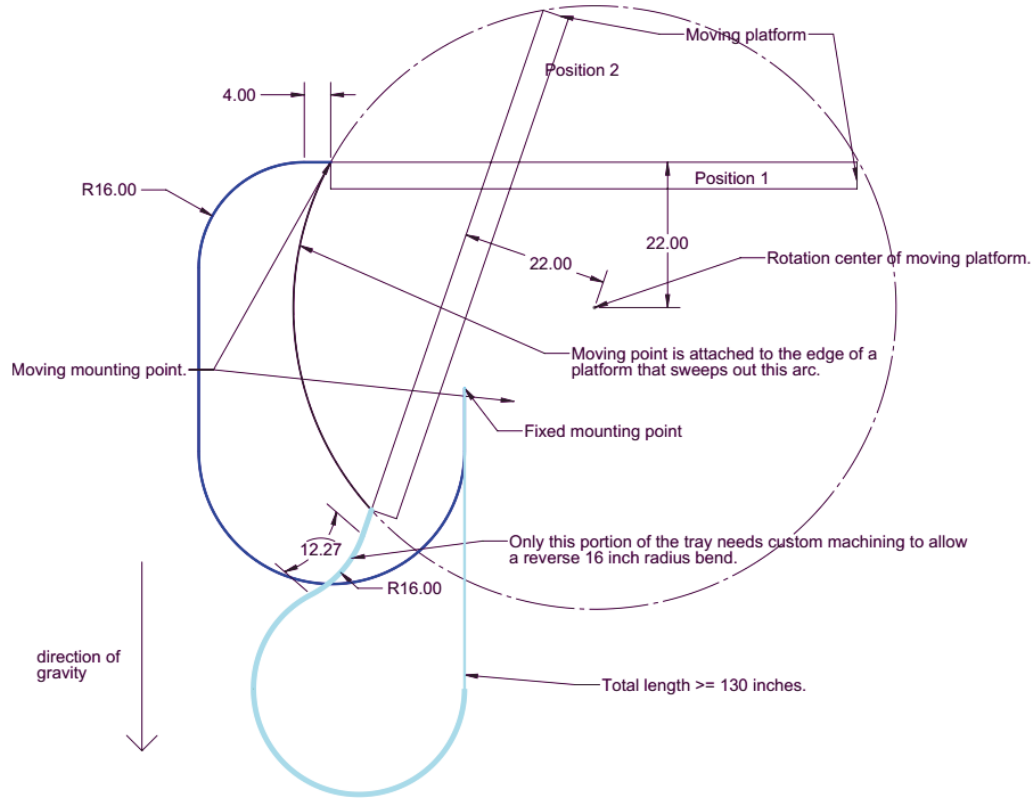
Elevation cable wrap schematic diagram. Looking from the side, two colored curves shown the cable wrap configuration at two extreme boresight angles: 20° and 90° . The fixed end is installed at the azimuth platform while the traveling end travels with the boresight bearing plate. Some dimensions (in inches) are also pointed out in this figure. Figure credits: Joseph Eimer
